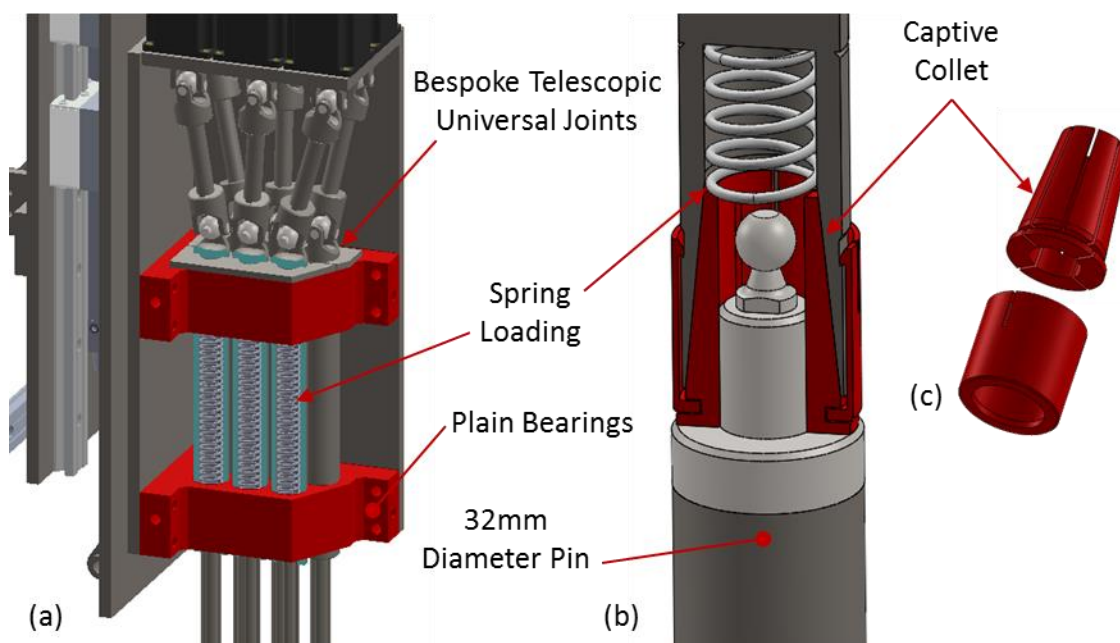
Spring loading of the telescopic universal joint units (a) and coupling system (b) with an exploded view of the captive collet (c)
